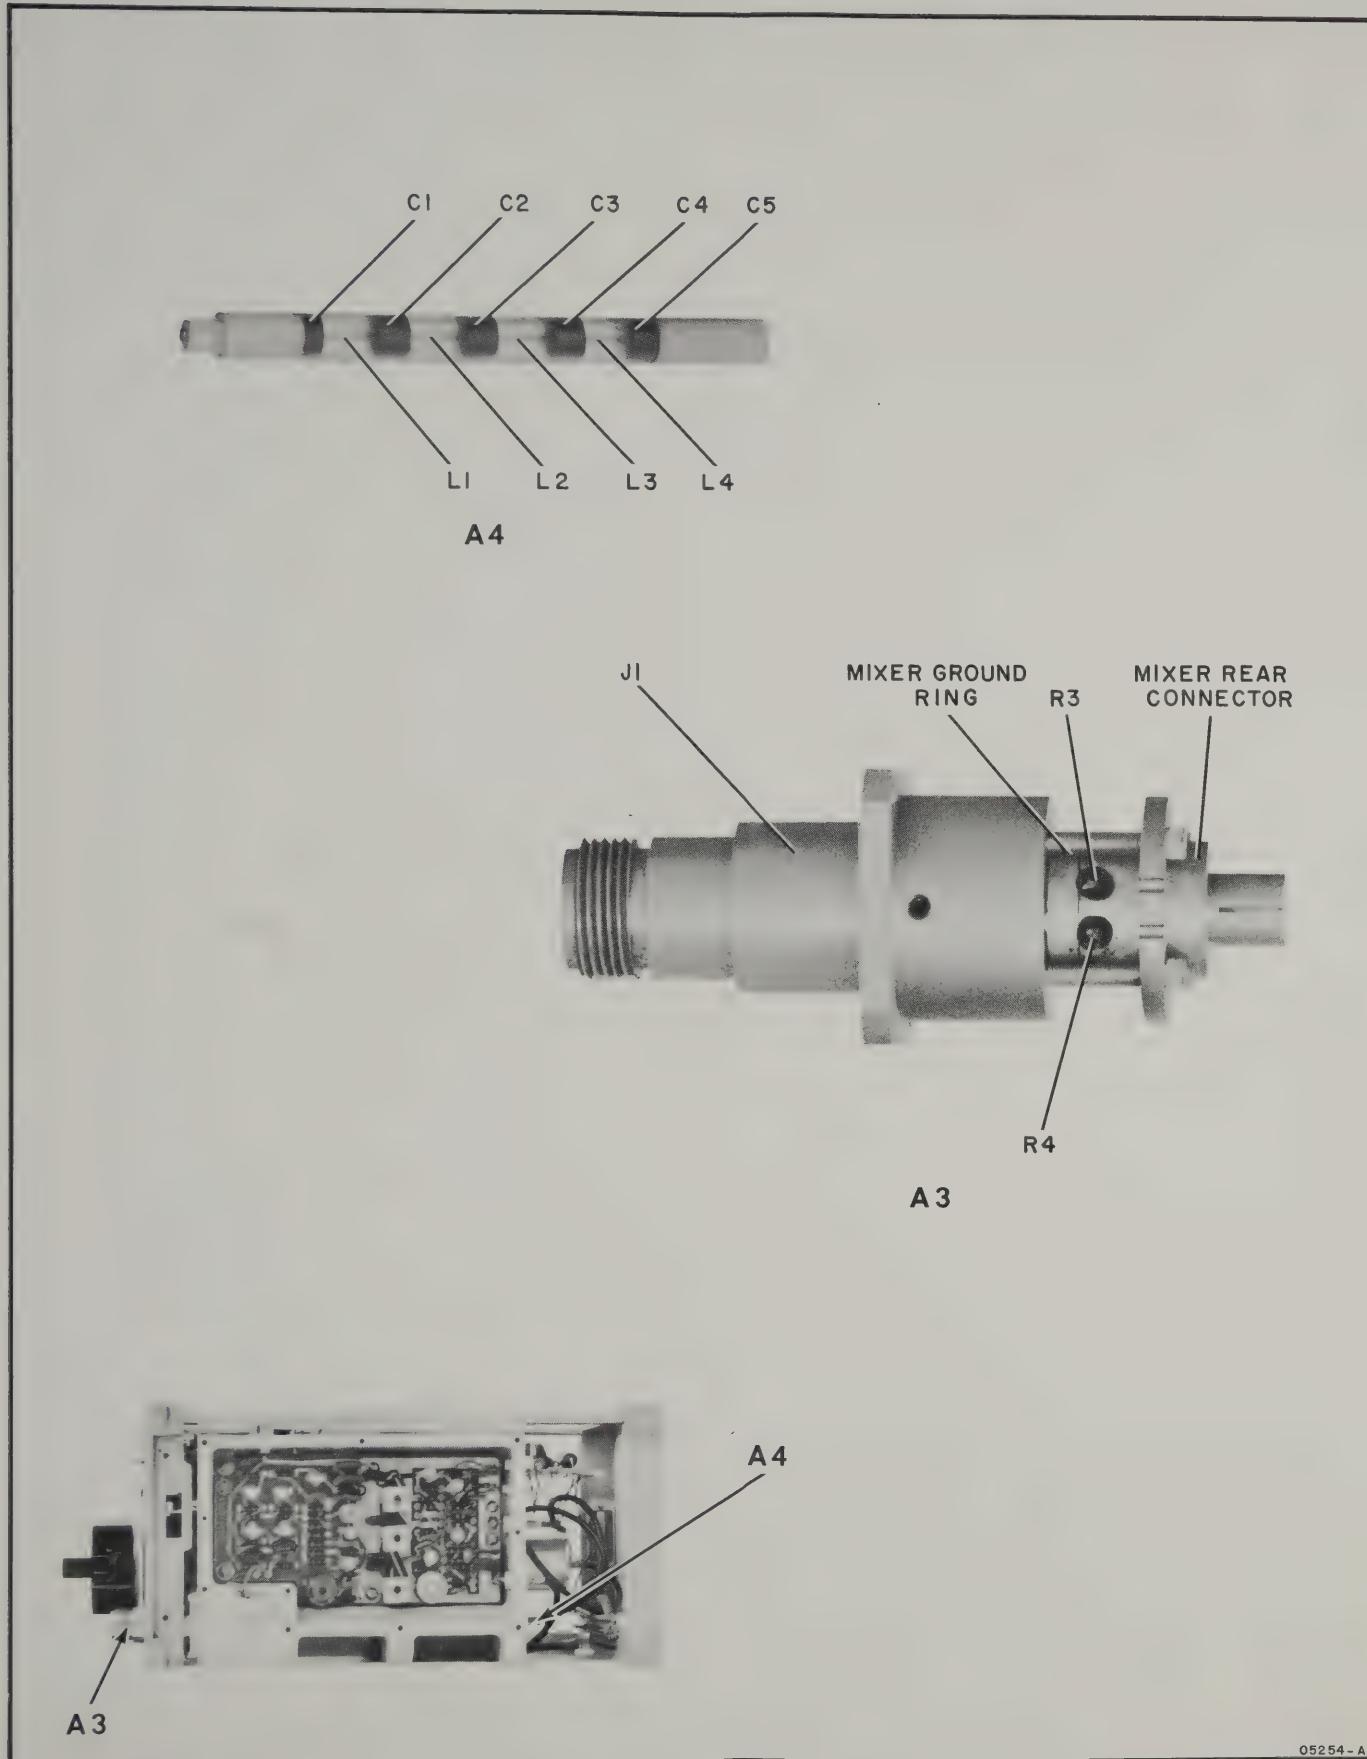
Filter Assembly A4, and Mixer Assembly A3, Component Location
